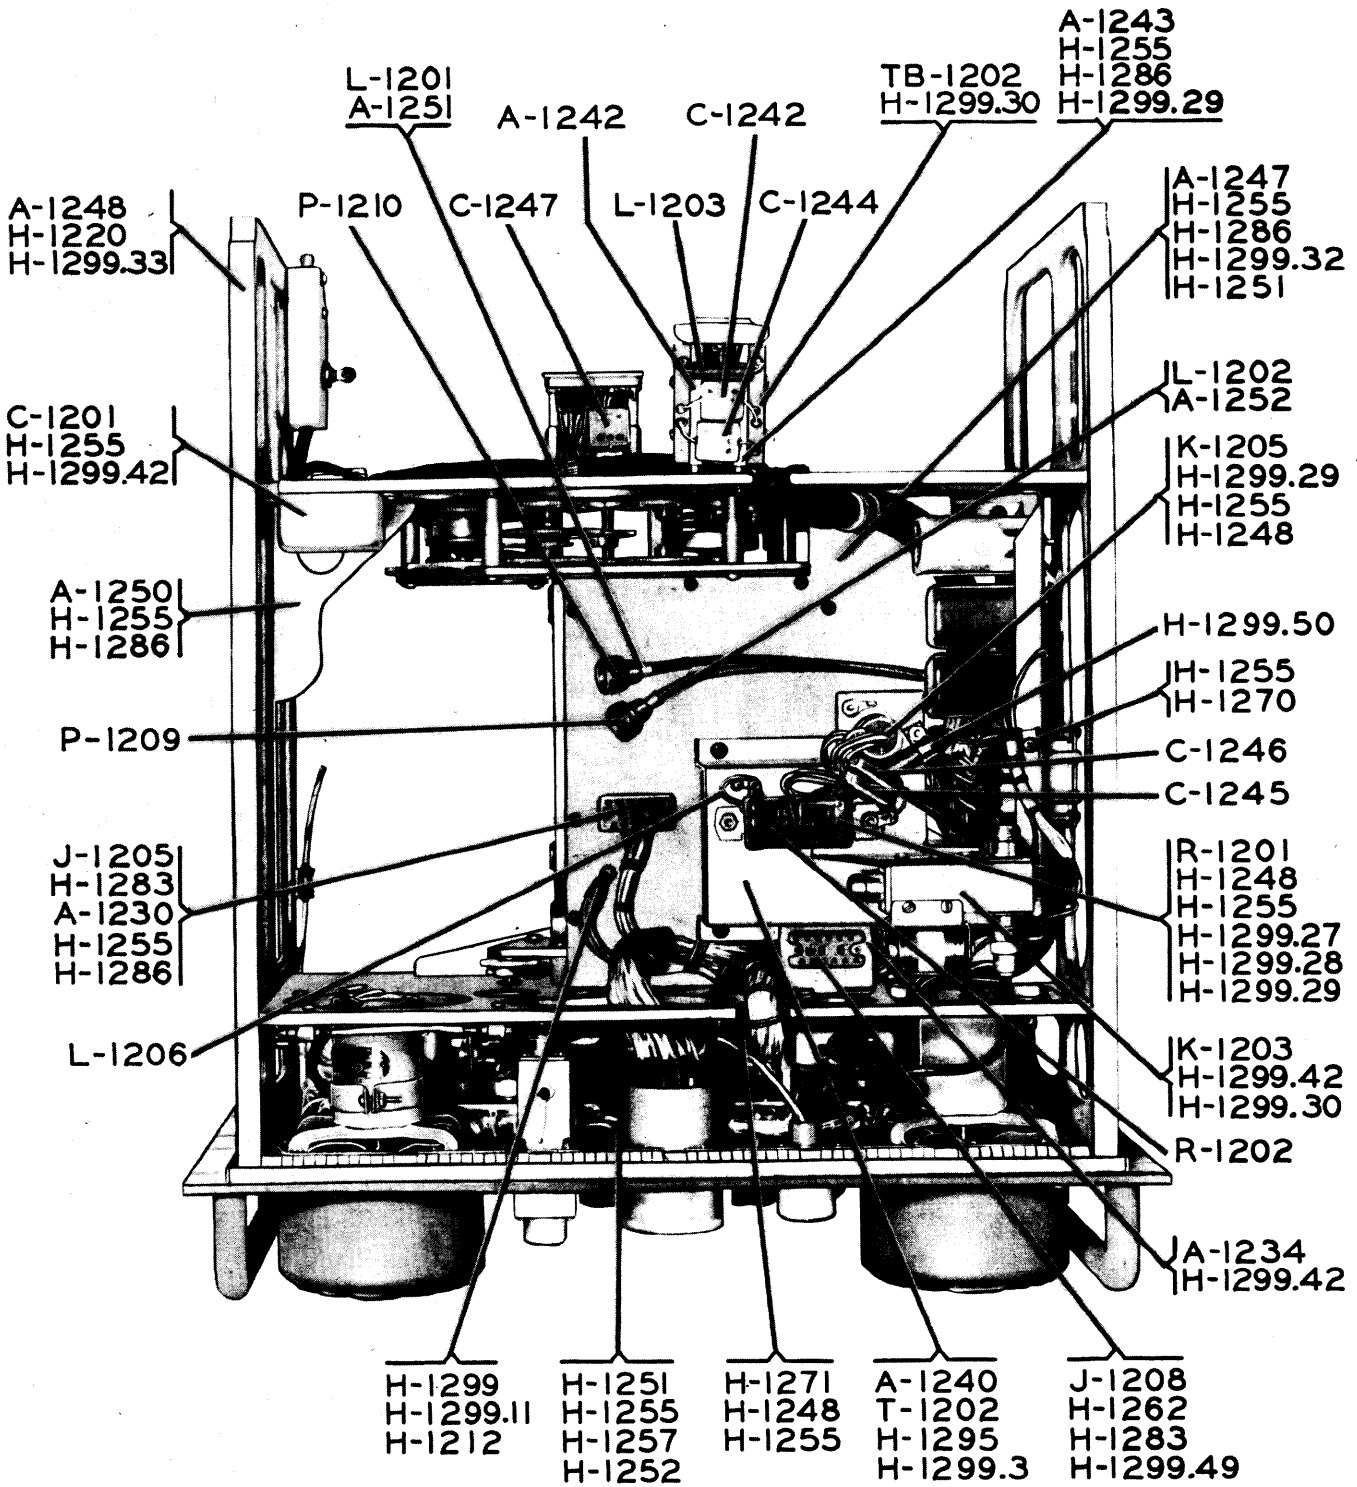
Radio Transmitter, Bottom View, Subunits Removed
